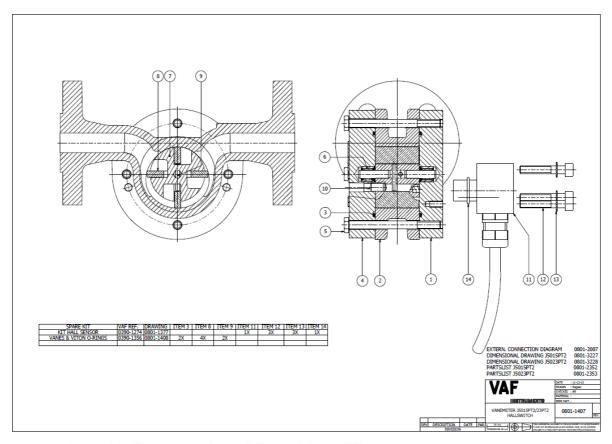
Assembly Flowmeter J5015PT2 and J5023PT2
